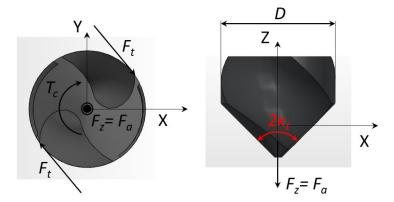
Cutting or tangential force (F_t), thrust force (F_z) and cutting torque (T_c) in drilling process. Drill bottom view (left) and front view (right).
